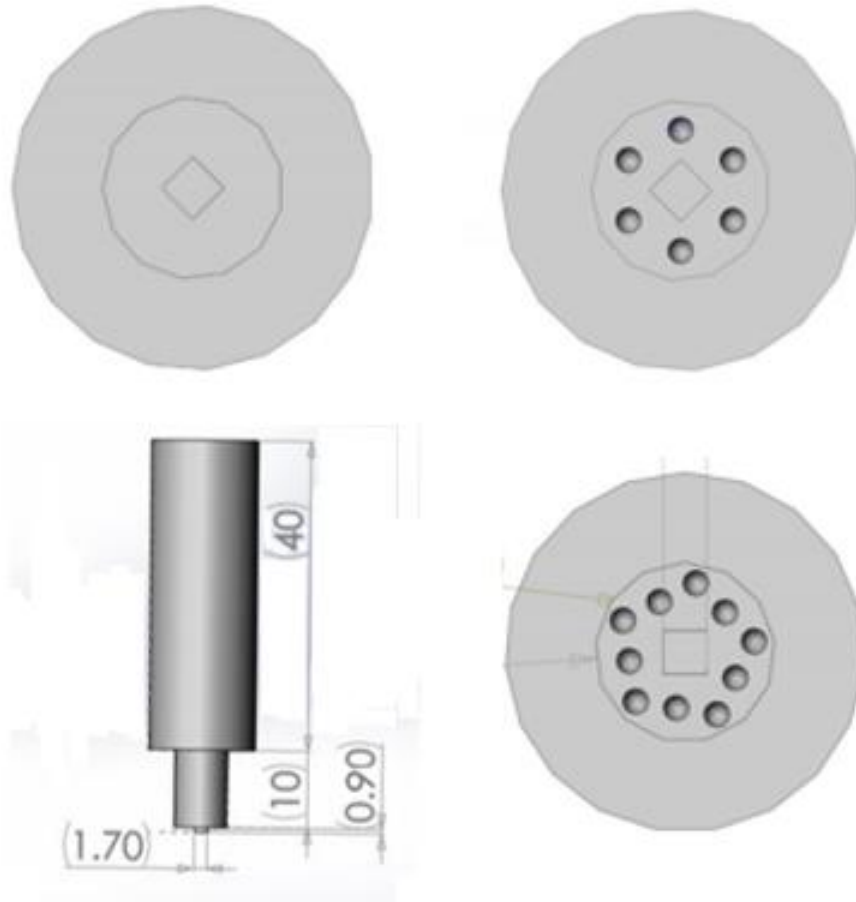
Tool Design: Featureless base (top left), 6 Holes (top right), 10 holes (bottom right), tool dimensions (bottom left)
